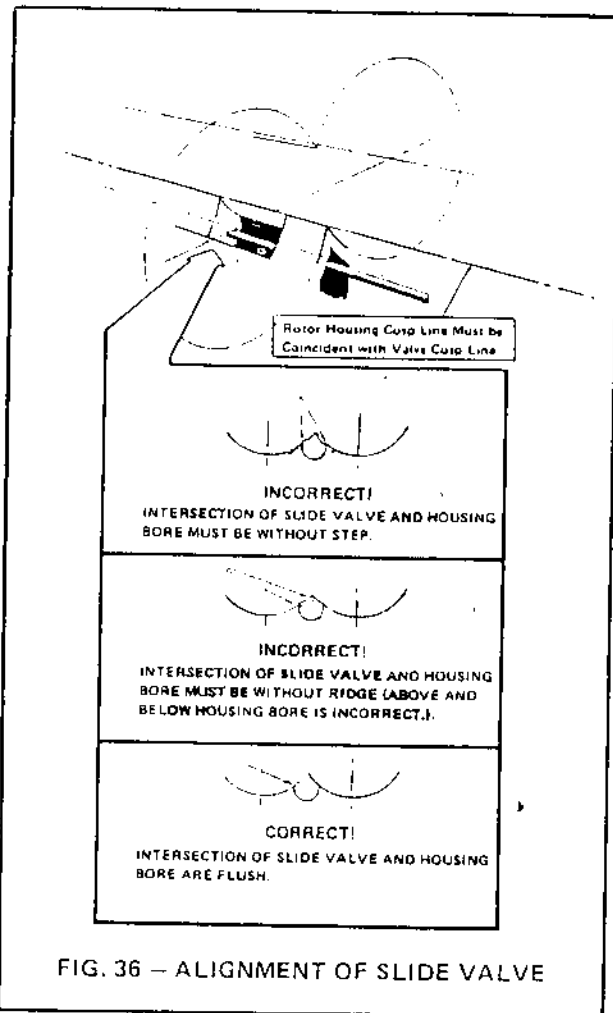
ALIGNMENT OF SLIDE VALVE
